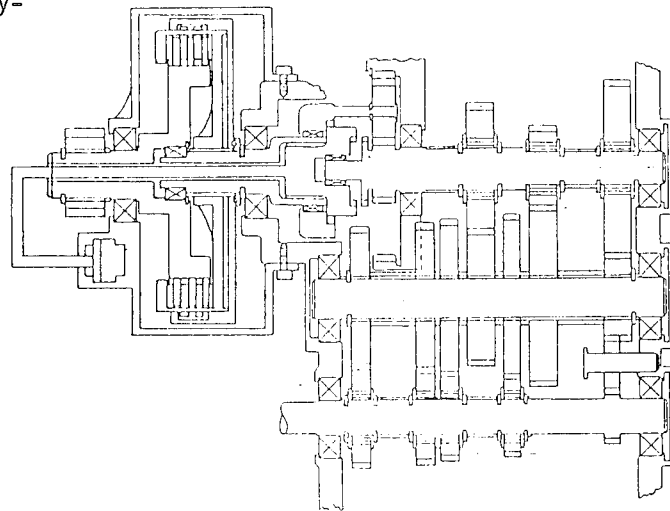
A 12-speed gearbox with slipping clutch CVT (design by Michael Nohr<sup>8</sup>).
